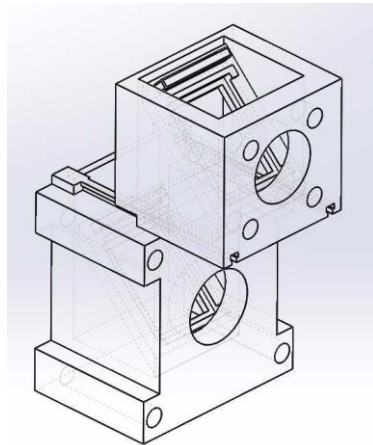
SOLIDWORKS design of dichroic and fold mirror filter cube. The top dichroic filter cube is enclosed with a top that has a 26 mm hole in order to attach the objective lens which is directed under the cells. The center and outside holes were dimension
